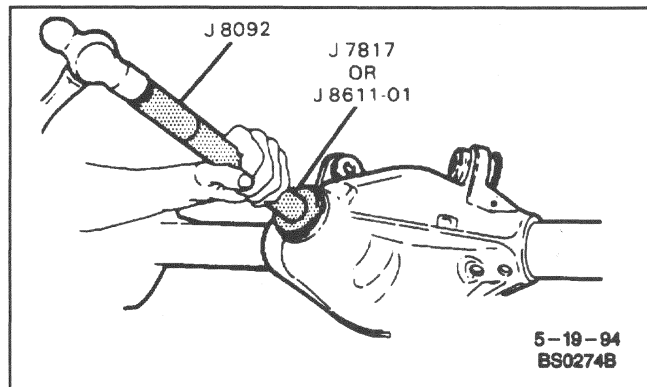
Installing Differential Drive Pinion Gear Outer Bearing Race
